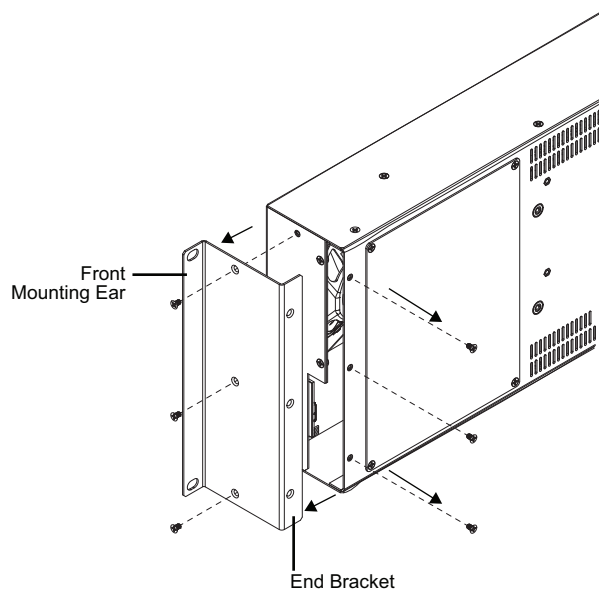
Removing the Left Rack Mount Bracket from the Ultritouch-4 Panel
